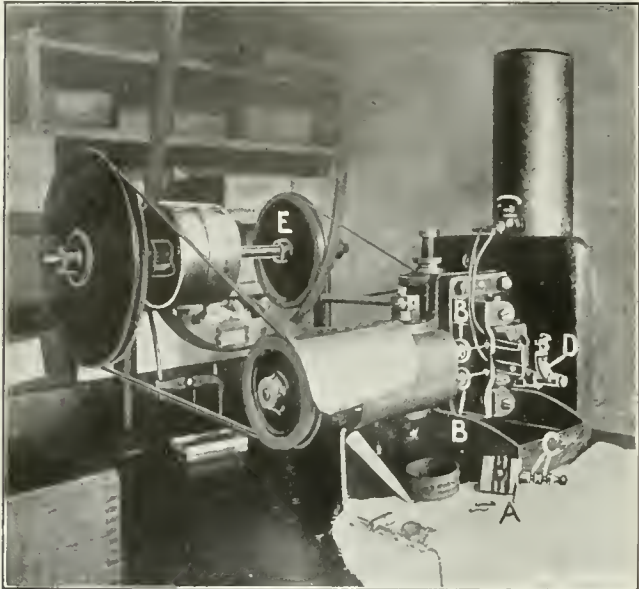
Machine for Milling Oblong Holes in Flexible Shaft Links
